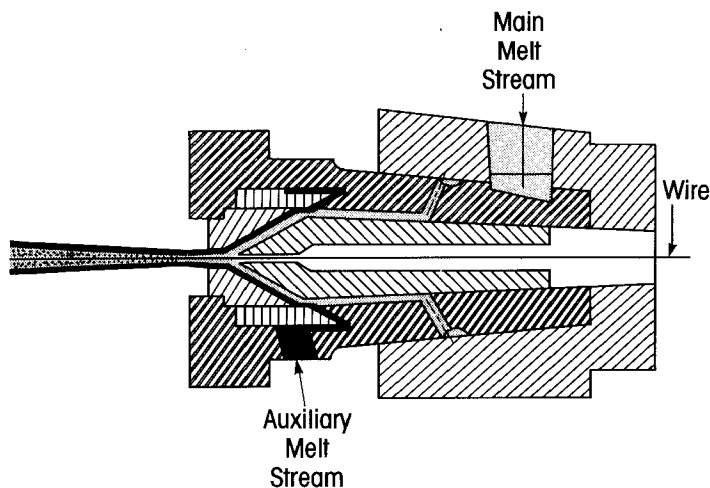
Maillefer 4/6F Wire Coating Crosshead, Foam-Skin Extrusion
